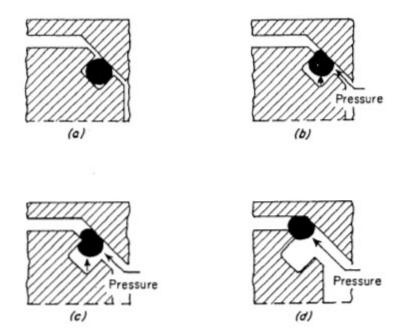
Blowout of O-ring used as a valve seat. As the valve opens, the space between the two faces becomes larger. The pressure acts on the O-ring. The ring continues to seal the opening util it is completely stretched out of the groove.
